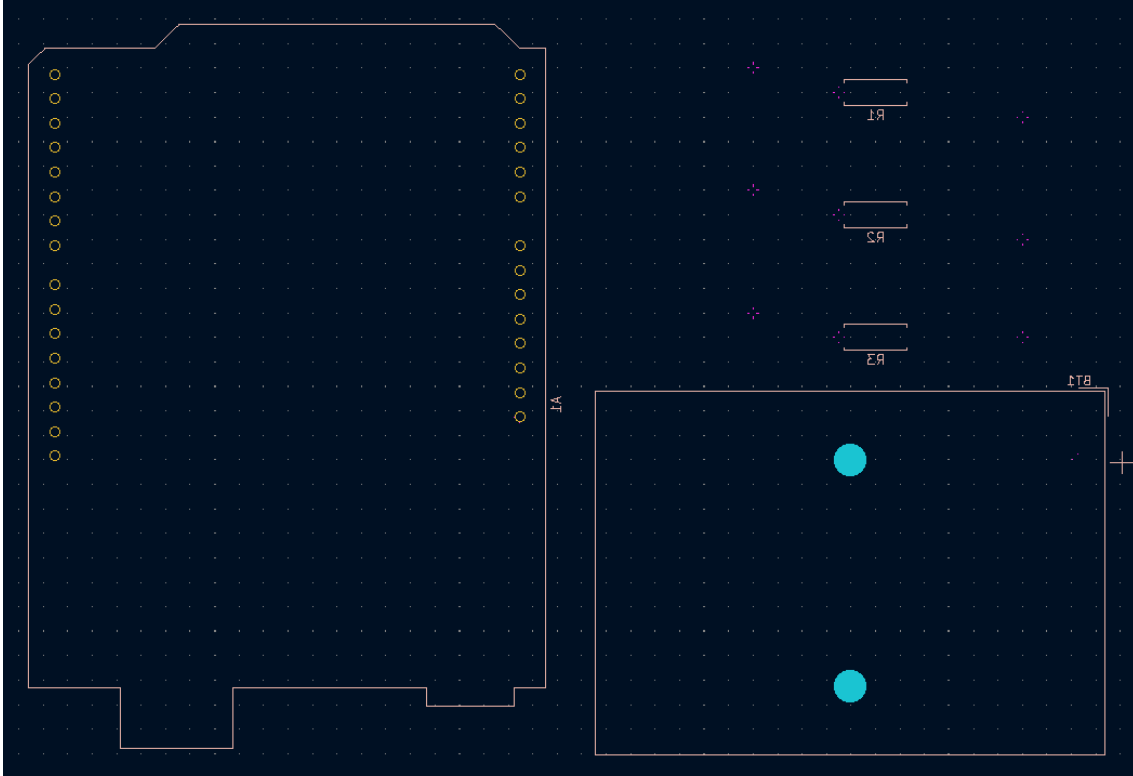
This is the back silk screen layer of the PCB which shows where all the components on the back side will be placed.
